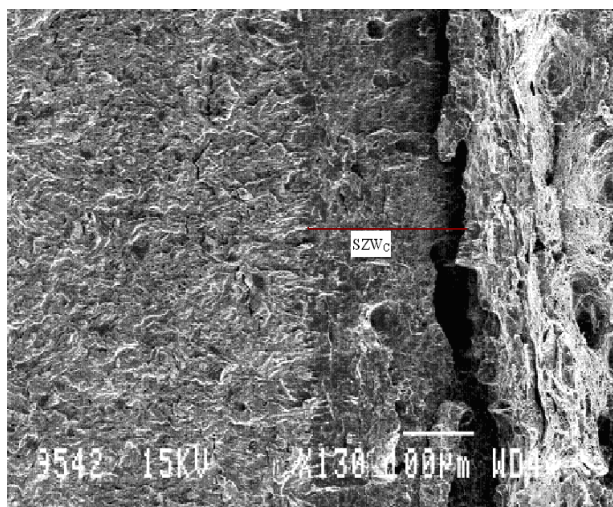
Fracture surface and Stretch zone for 20MnMoNi55 steel at 22°C
